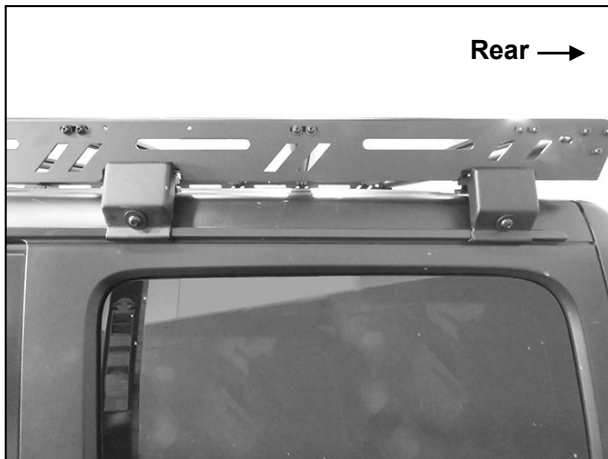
Attach Center Bracket Clamp Cover to driver/left #2 & #3 Inner Mounting Brackets
